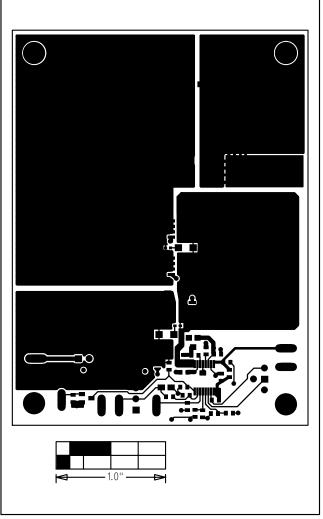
MAX8554 EV Kit PC Board Layout—Component Side
